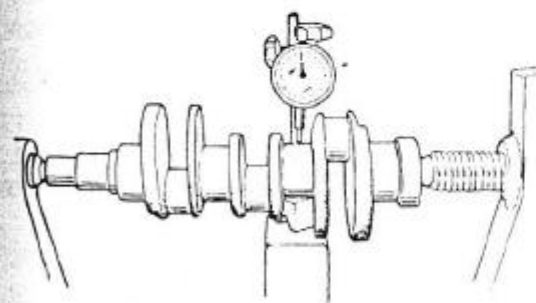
A — 100 MEASURING THE BOW OF CRANKSHAFT
